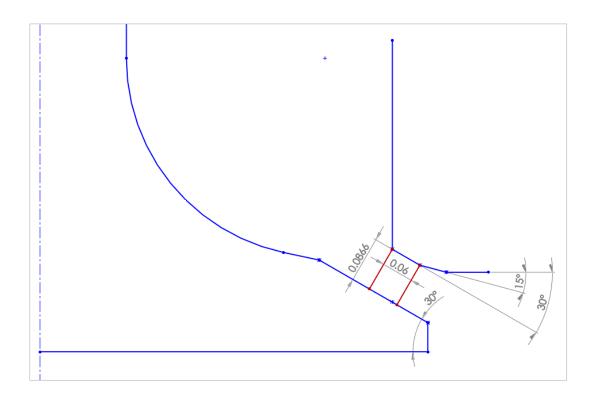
Drawing of the 30° valve and seat opened at 0.1 inches
